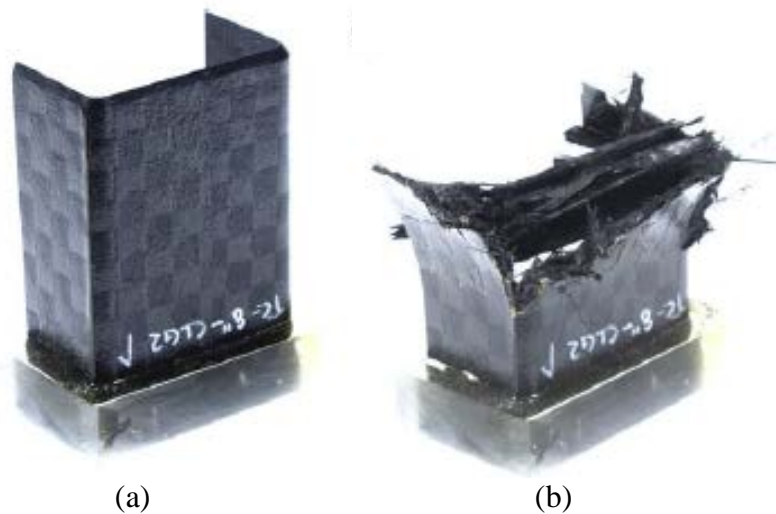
Large C-channel, specimen II, (a) before and (b) after crush testing
